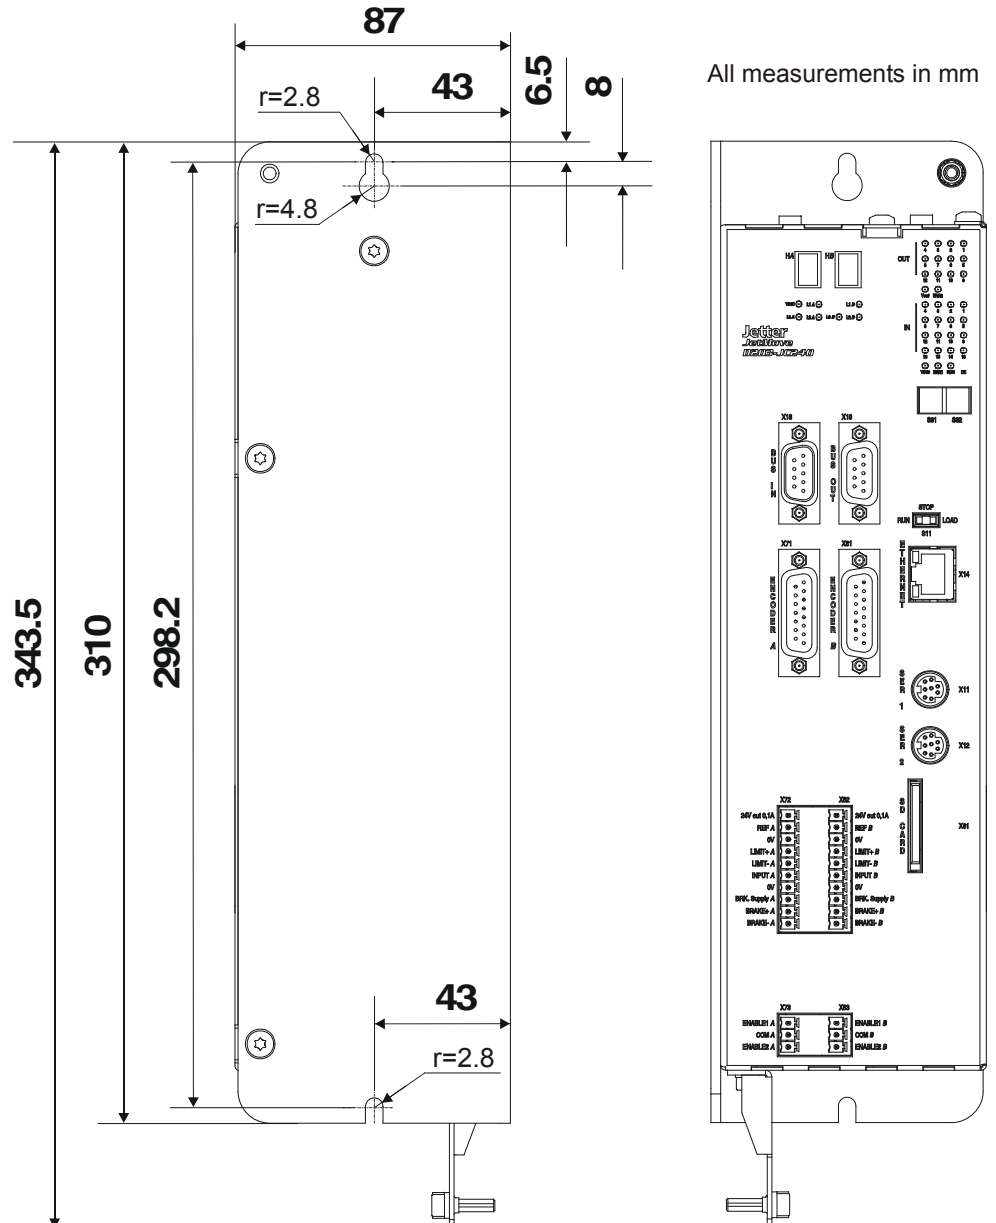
Rear/front view of the JetMove D203 enclosure with mounting holes
